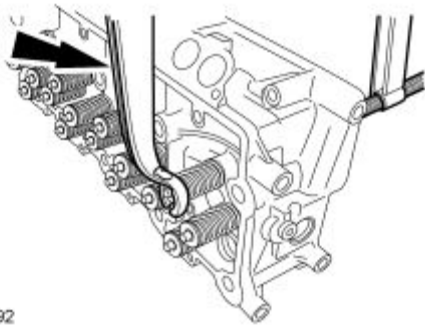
Identifying Rocker Arm Carrier Bolts
